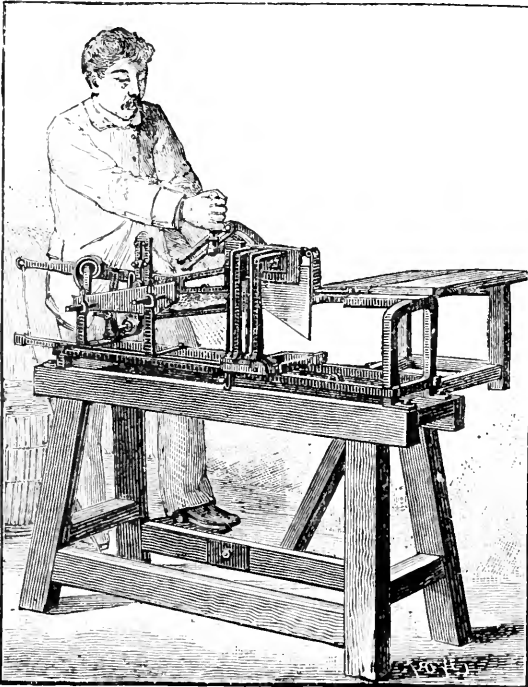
MACHINE FOR CUTTING CORK-STRIPS.
